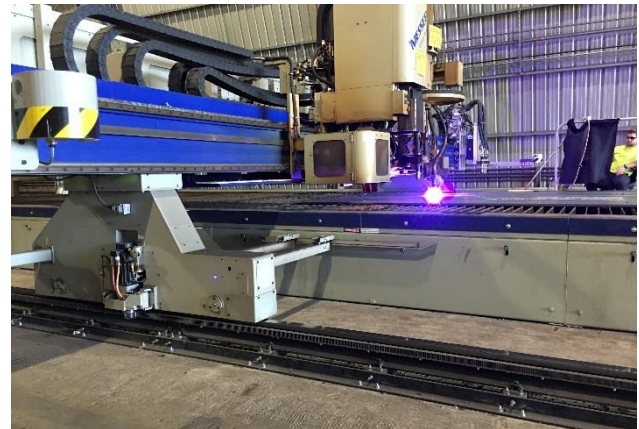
Computer Numerical Control Machine. the ASTM 6/6M testing.
